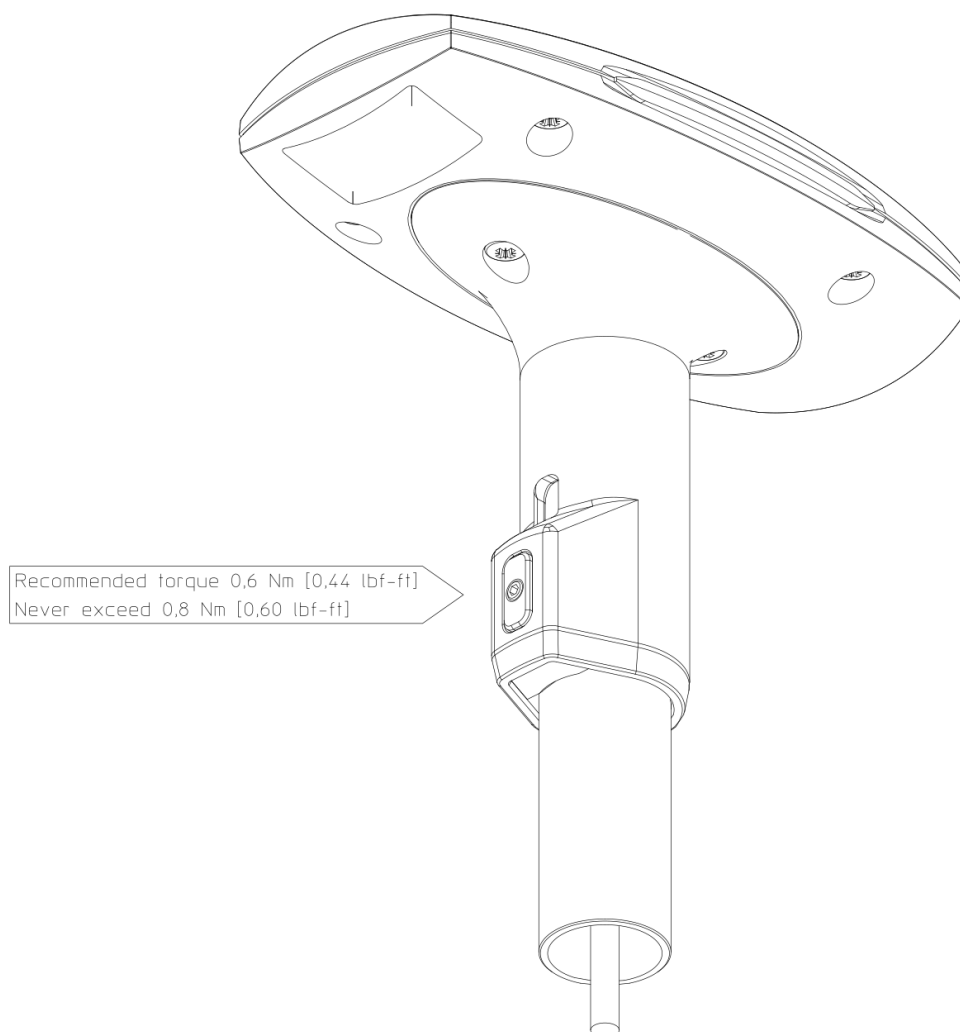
POLE MOUNT INSTALLATION STEP 7 (FASTENING THE PINOL SCREW IN THE POLE MOUNT)
